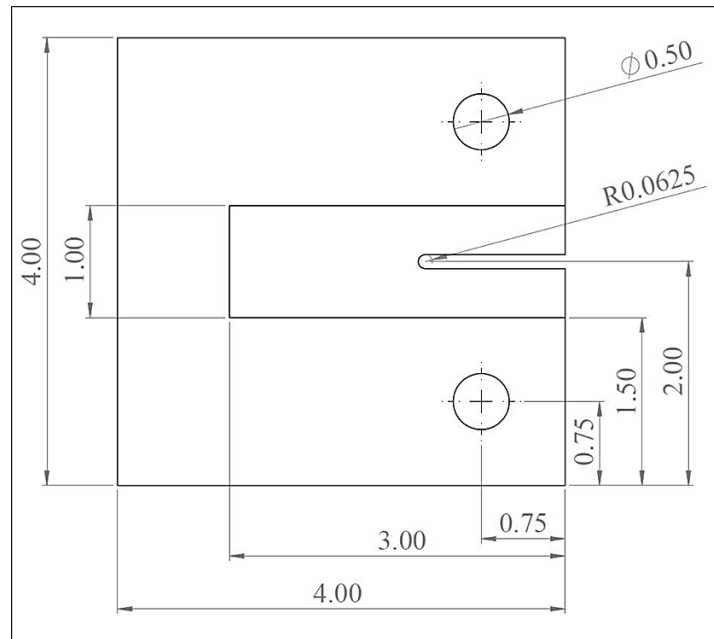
Final CAD drawing of Stepped specimen geometry. Dimensions are in inches. An example notch length of 1.25-inch is shown.
